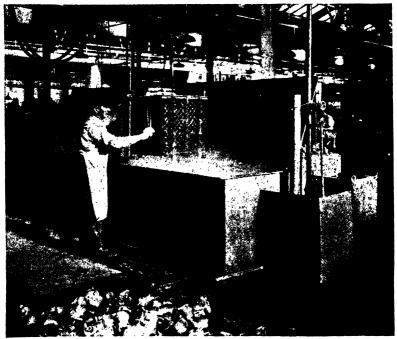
Carburetors and other similar parts are frequently rustproofed by immersion in still tanks. This shows a load of carburetors about to enter a process tank for parkerizing.
